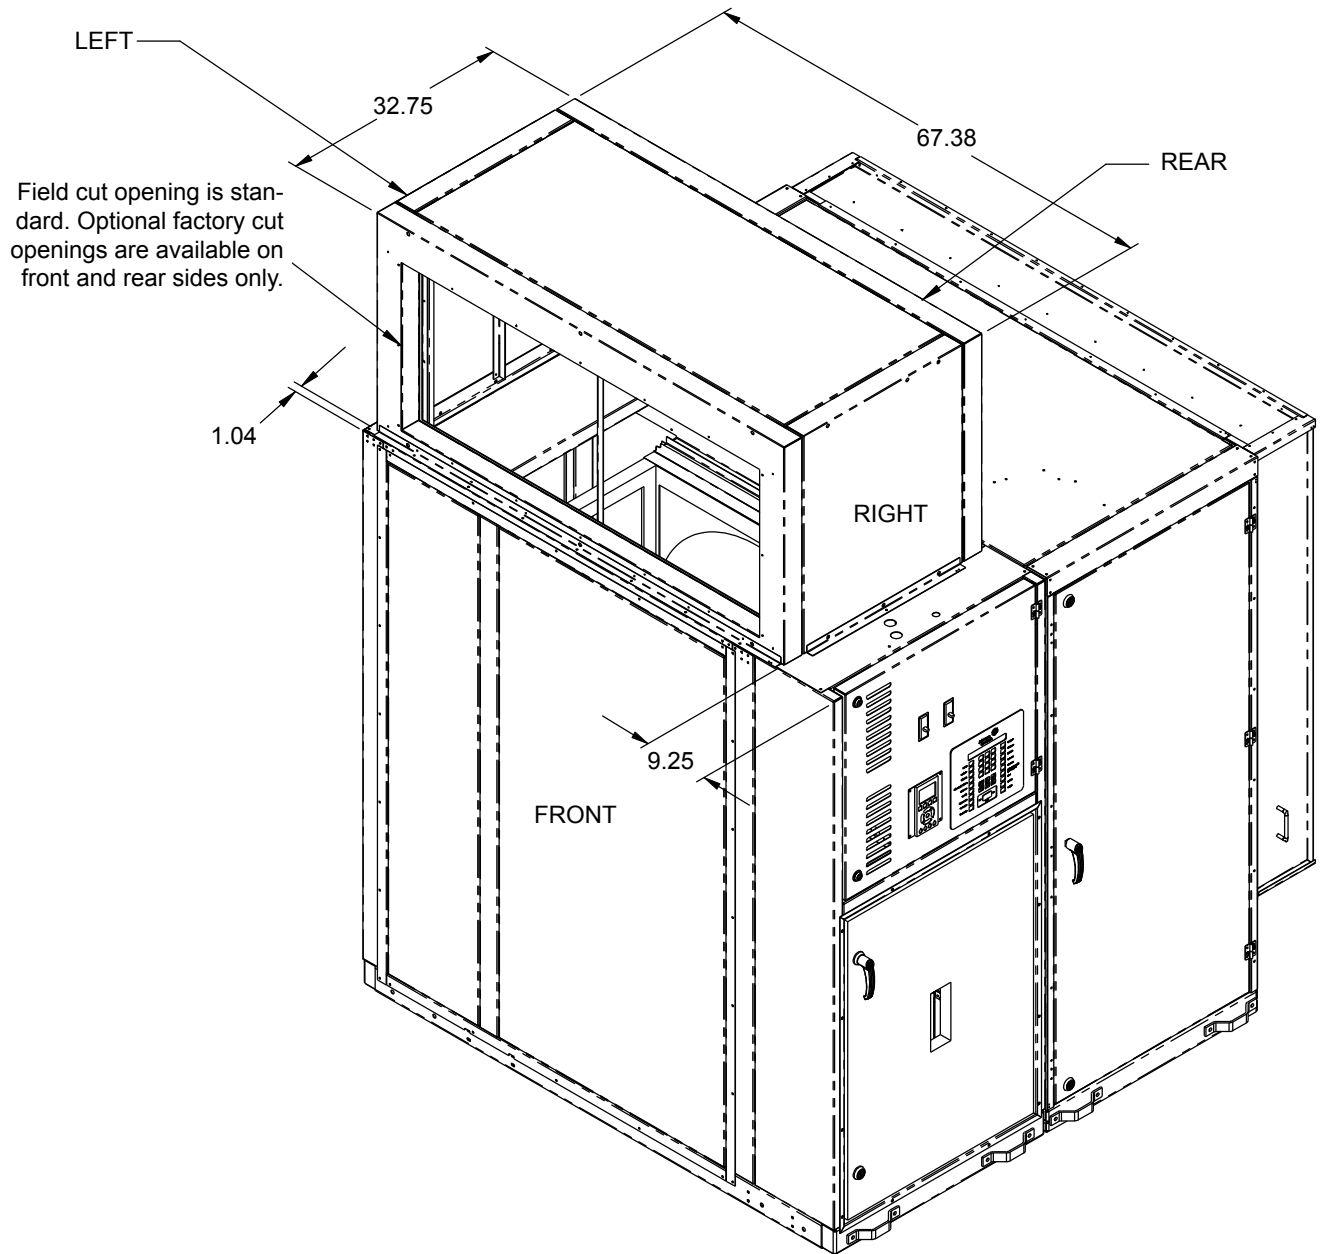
UNIT DIMENSIONS ALL MODELS, FRONT DISCHARGE, ASSEMBLED (LSWU062 - LSWU105)
